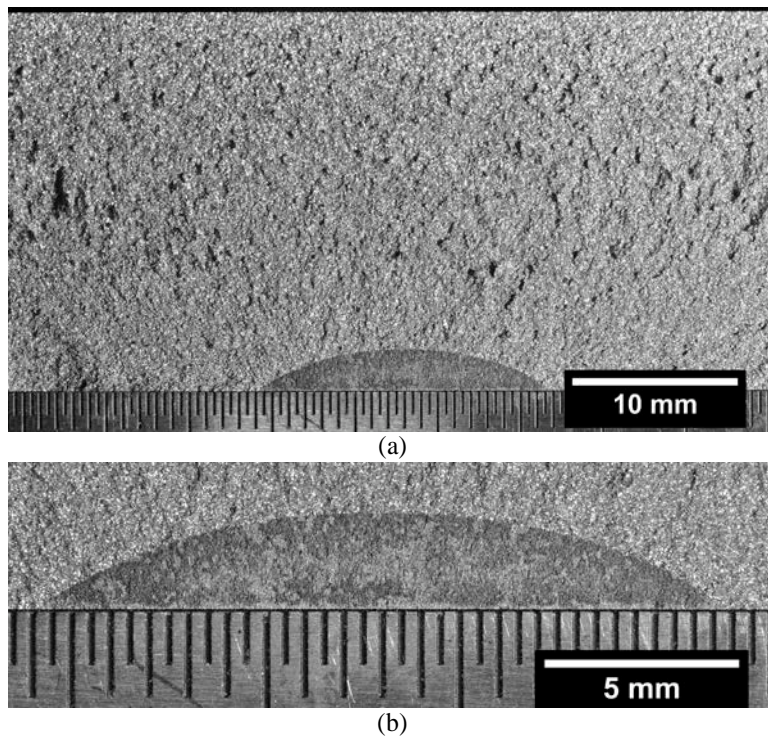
Optical fractographs of exposed fatigue crack from the NDE SD 6-002 specimen, showing (a) the full specimen thickness and (b) a closeup of the fatigue crack region.
